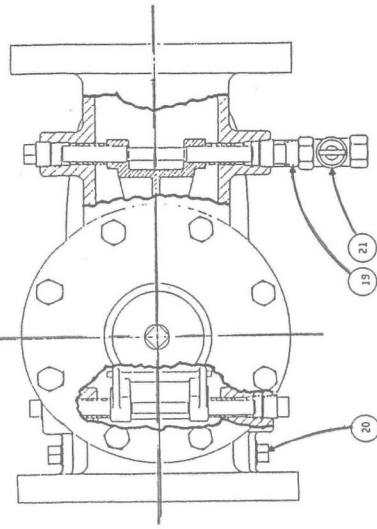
3084 CHECK VALVE SHOWN (TOP VIEW)
